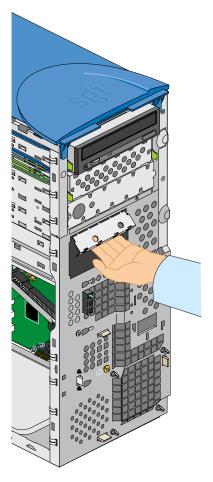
Detaching 3.5-inch Drive Filler Plate
